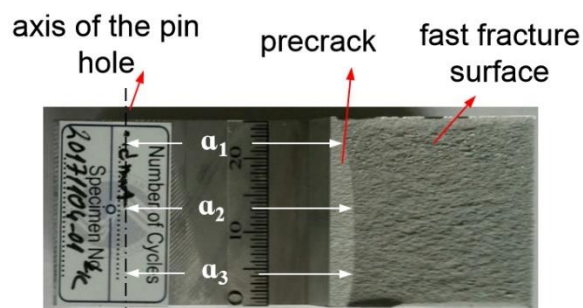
Measurement of precrack length on fracture surface
